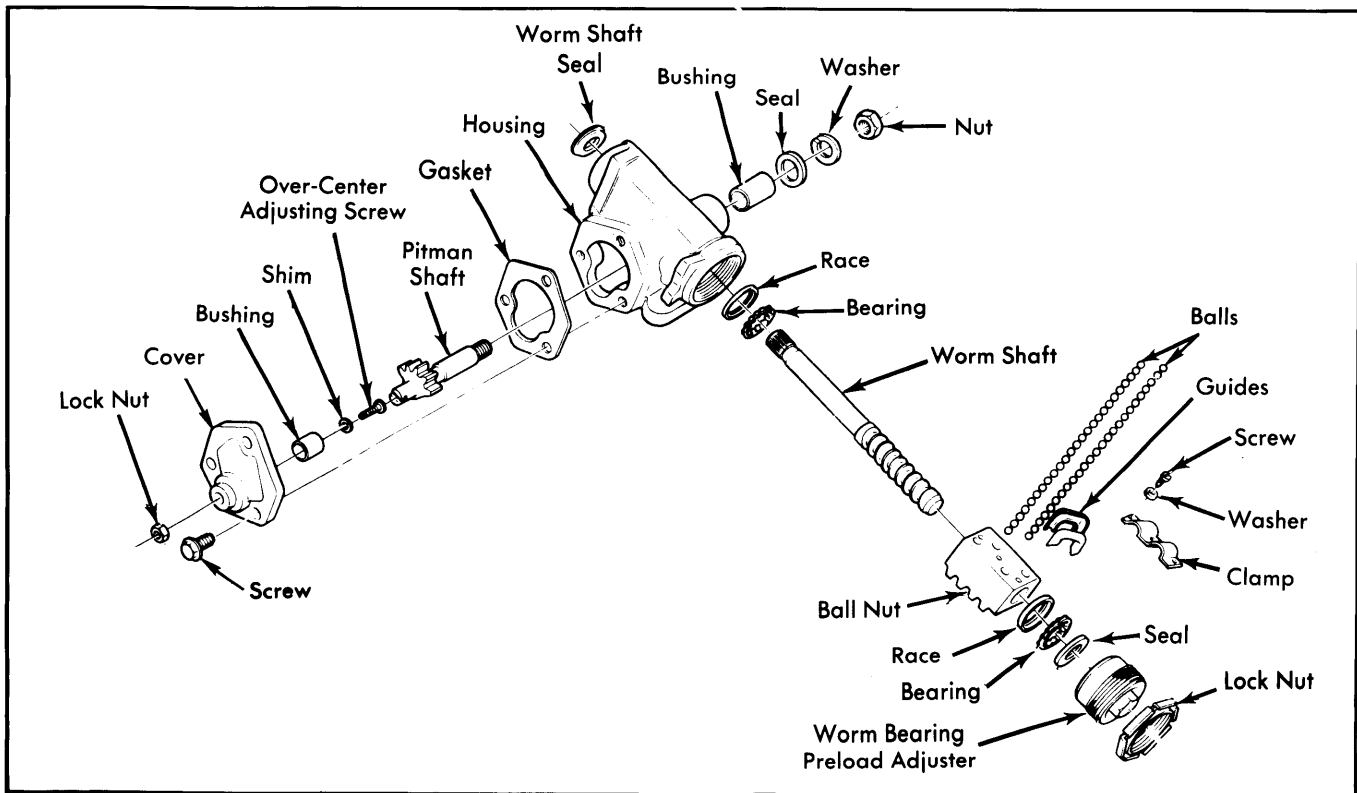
Exploded View of Recirculating Ball Steering Gear (General Motors Model Shown)
